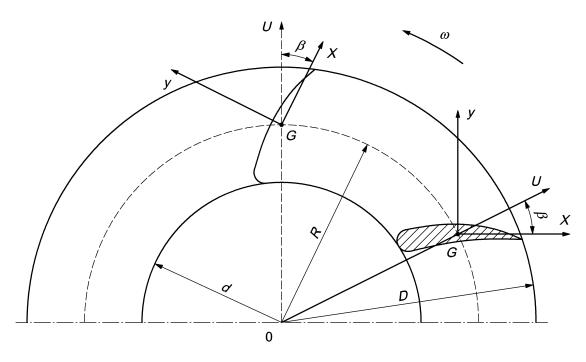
Centrifugal impeller, calculation of centrifugal forces about a principal axis
